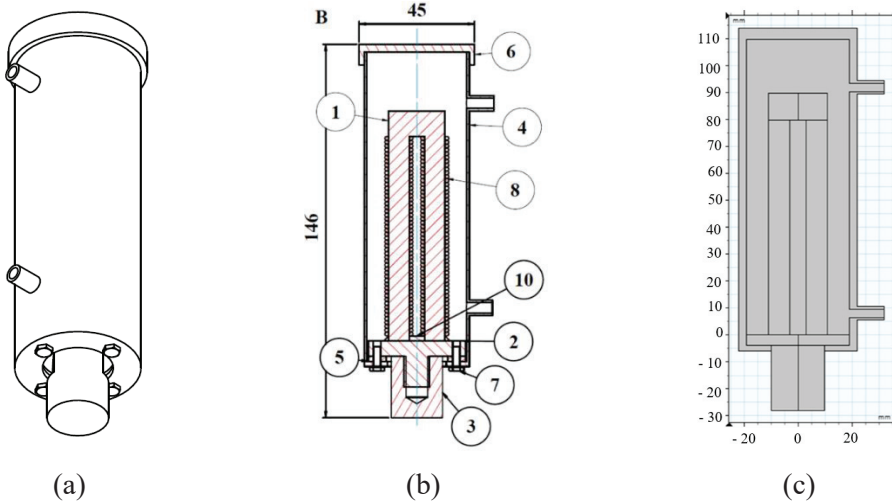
Magnetostriuctive hot stamping tool: (a) isometric view of the structure; (b) cross-sectional view of the structure: 1 – core, 2 – transition, 3 – forming tool, 4 – cooling chamber, 5 – intermediate, 6 – cooling chamber cover, 7 – nut, 8 – wire coils, 10 – insert; (c) mathematical simplified device 2D model
